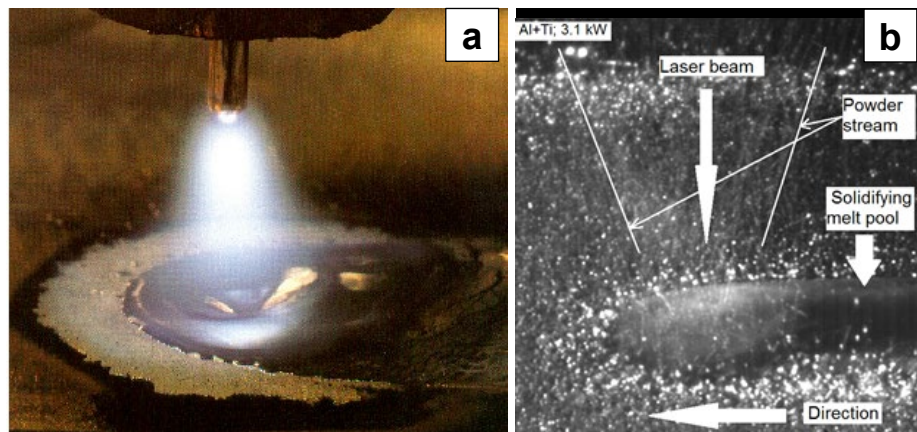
High speed video image captures from single bead welding processes. a) Cleaning effect in MIG/MAG surface welding of steel using positive electrode [151]. b) Laser cladding process [99].
